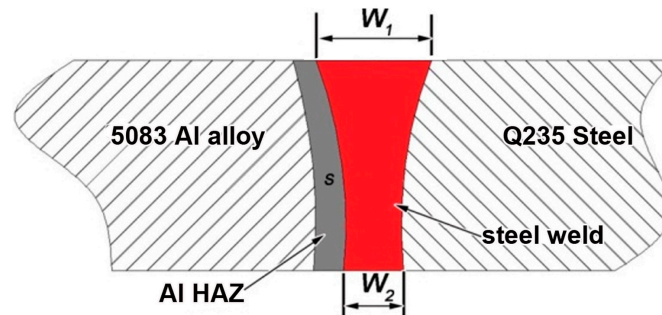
Diagram of dimensions of the weld cross section in the Al/steel butt joints.
